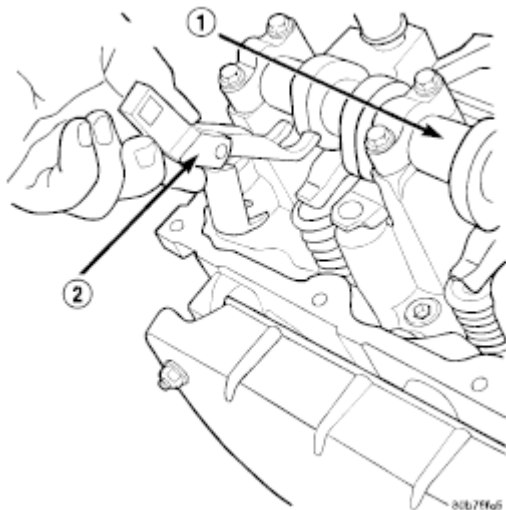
Identifying Rocker Arm And Valve Spring Compressor
